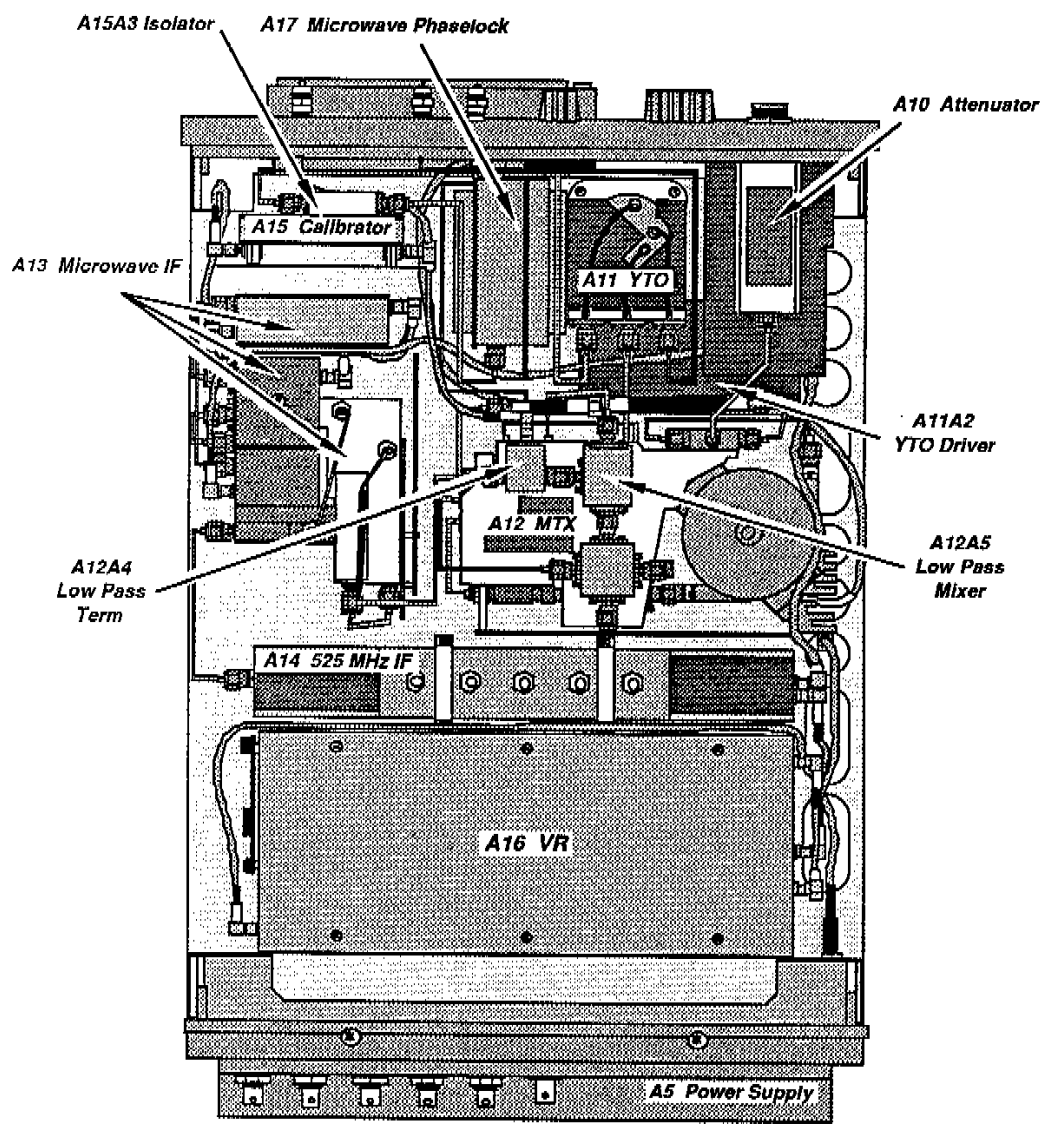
2782 Bottom Deck (RF Assemblies).
